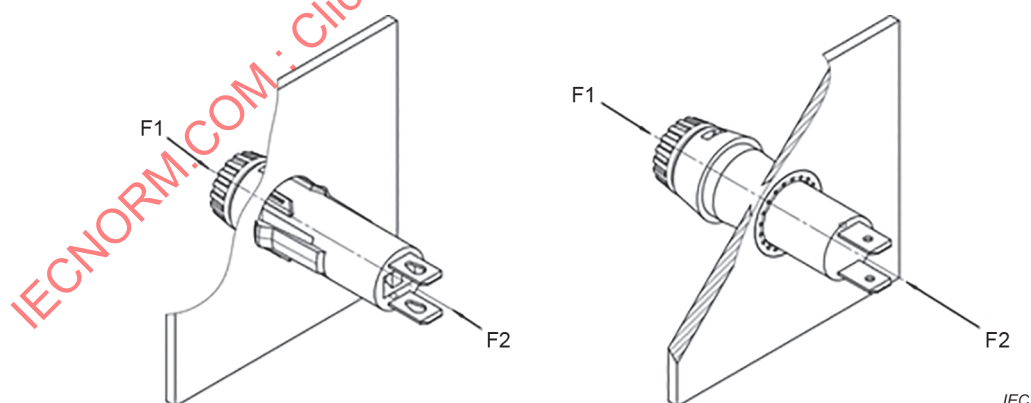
Examples of snap-in fastening fuse-holder fastening on panels
